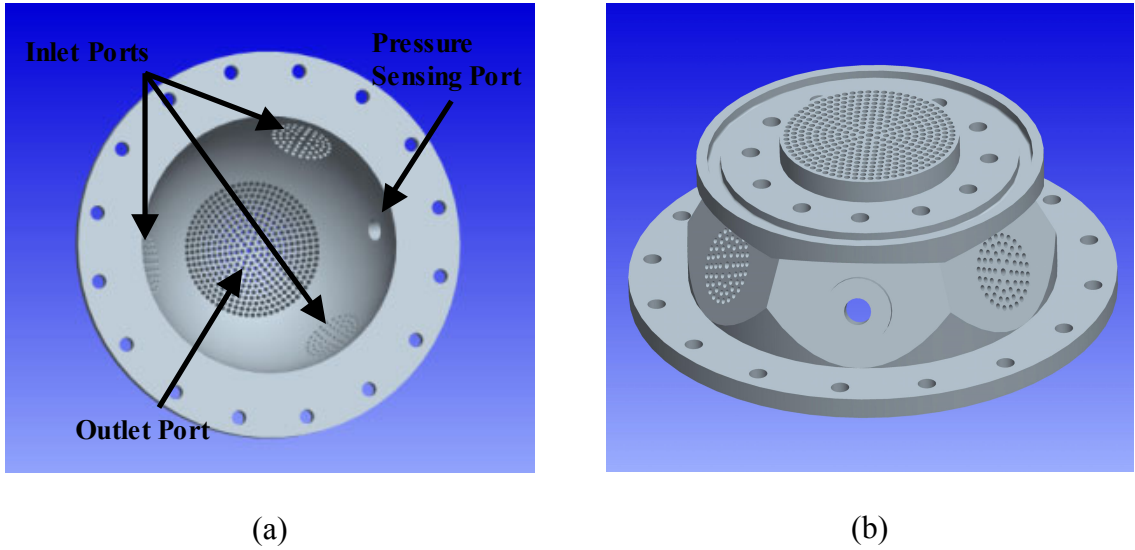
Pro/ENGINEER Drawing of Pump Chamber, Inside (a) and Outside (b).
